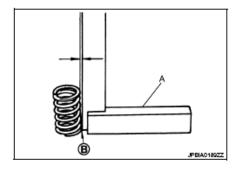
Measuring Clearance Between Top Of Spring And Try Square Courtesy of NISSAN MOTOR CO., U.S.A.
